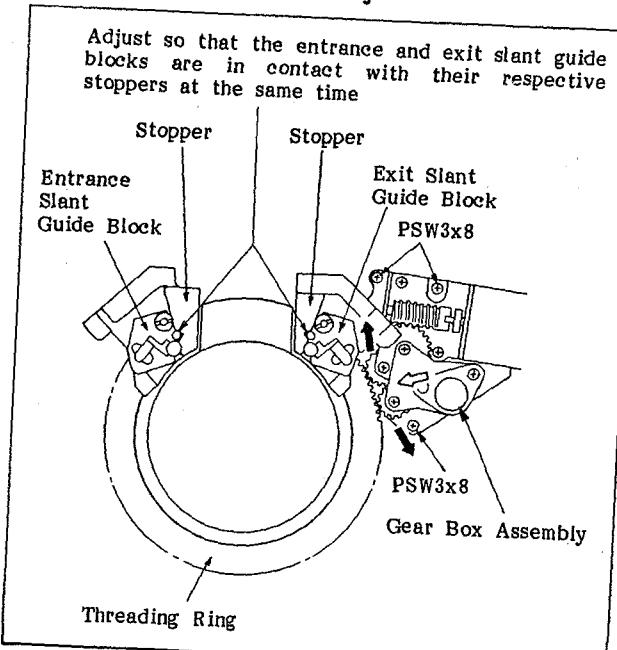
Adjusting the Position of the Gear Box Assembly
